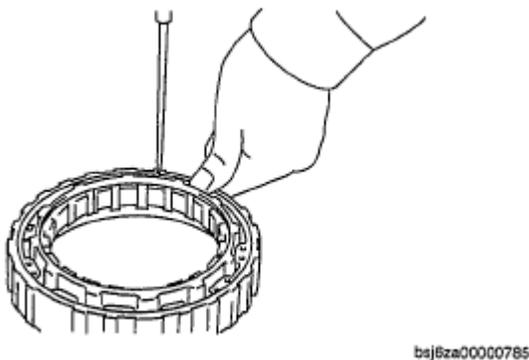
Installing Brake Cylinder Using Flathead Screwdriver
